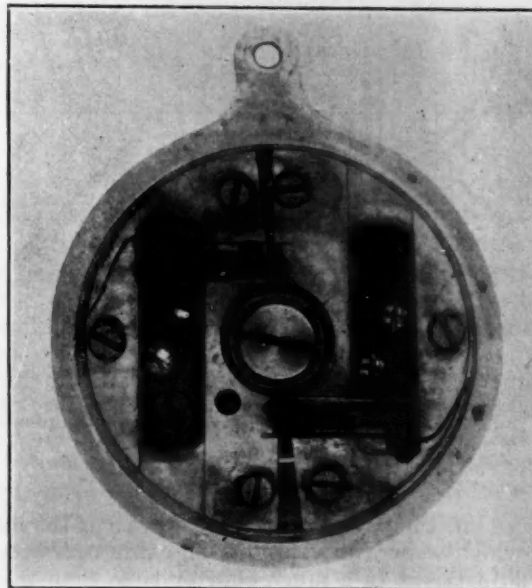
PIVOTLESS CONTACT-BREAKER DEVELOPED BY MATERIEL DIVISION OF THE AIR CORPS
